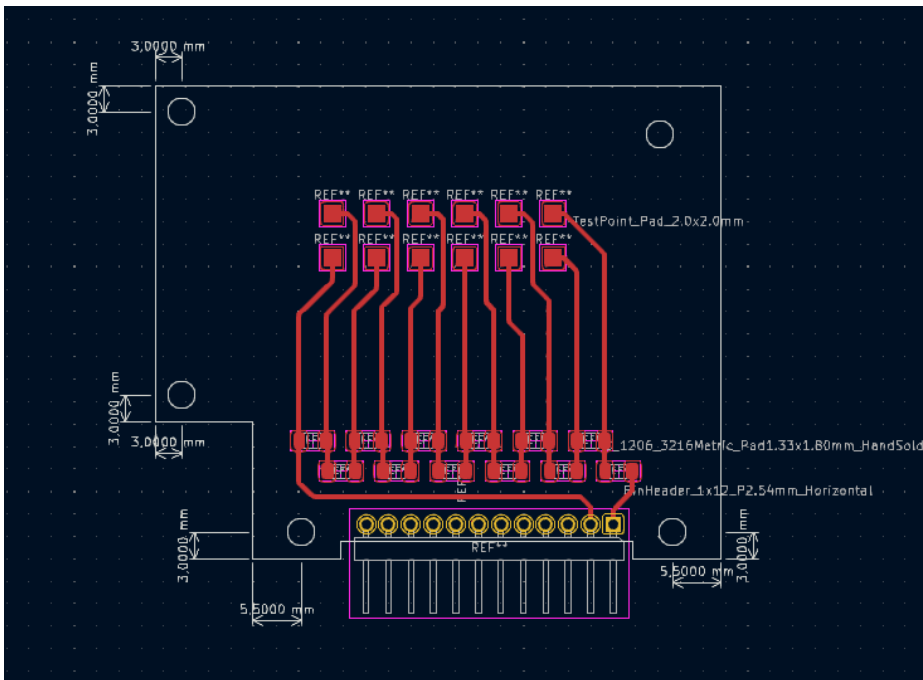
PCB layout view in KiCad of the circuit board that is used in assessing the functionality of the BoN-tester.
